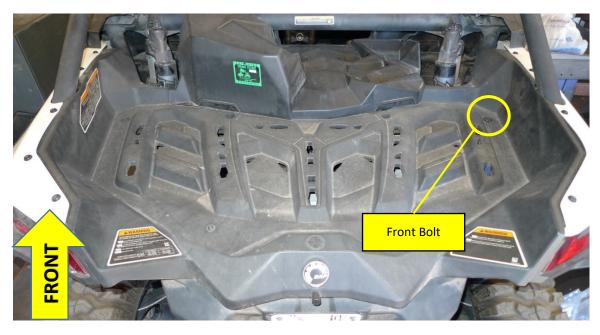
Air Tank Bracket Mounting Locations (top view)
